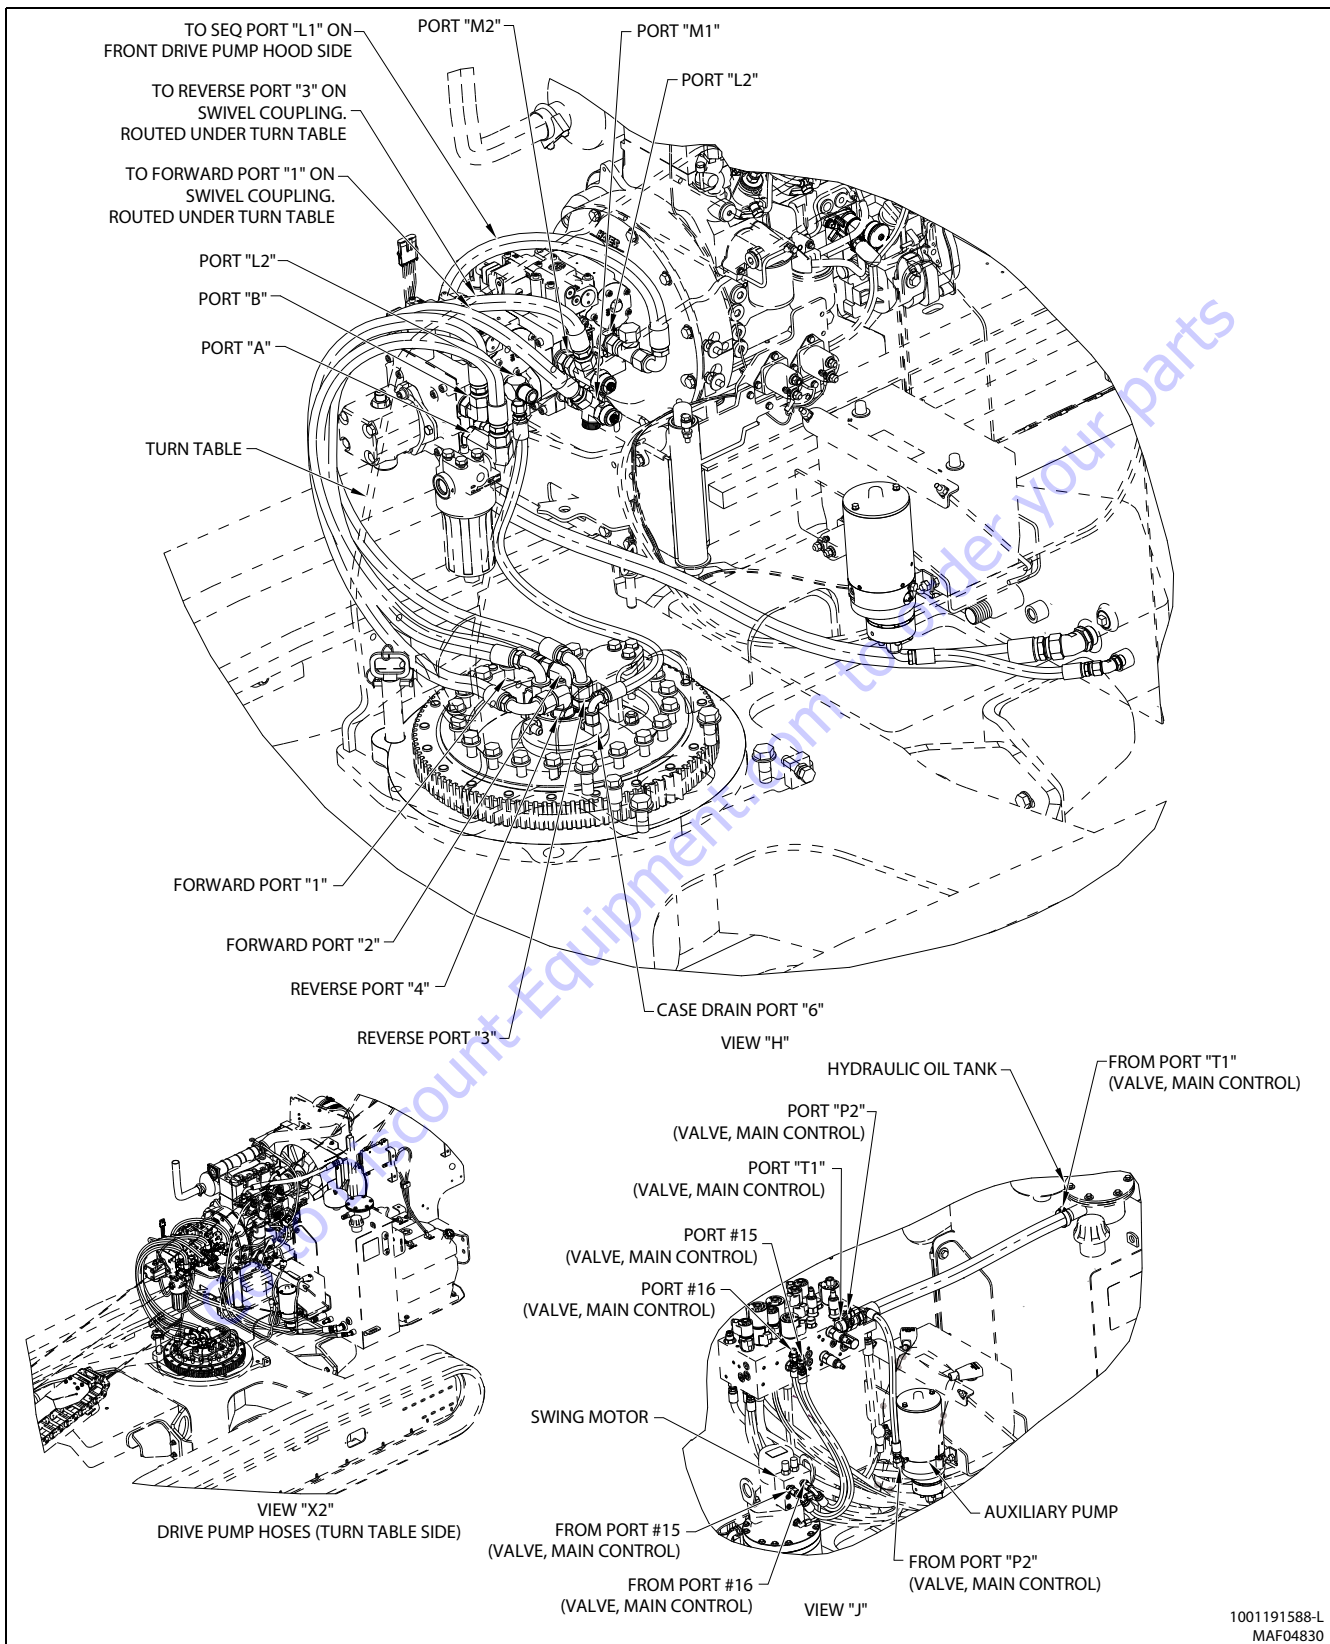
Hydraulic System Installation (400SC) - Sheet 8 of 16
